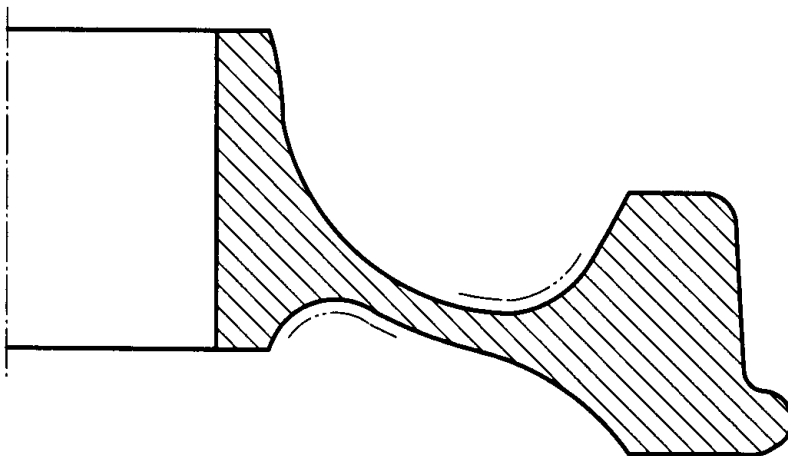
Location of peening test strips on the back side of the web near the hub fillet and the front side of the web near the rim fillet of reverse plate wheels
